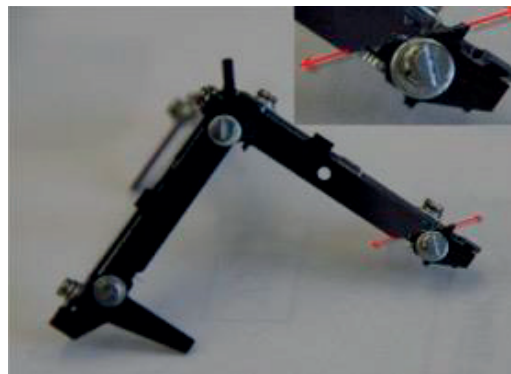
A bolted assembly of three parts, with a fracture along the red line.
